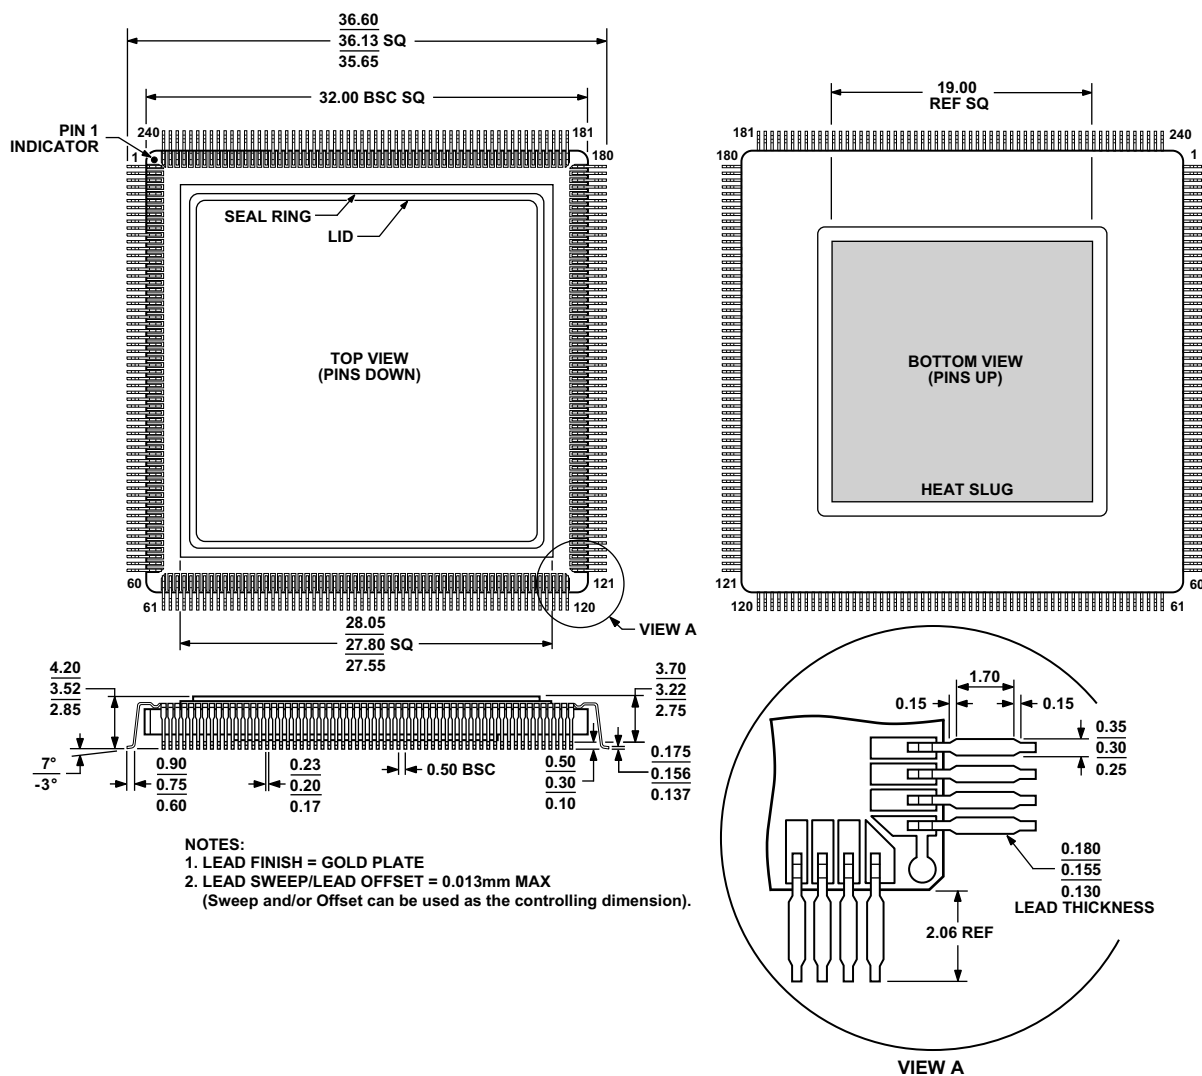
240-Lead Ceramic Quad Flat Package, Heat Slug Down [CQFP]
